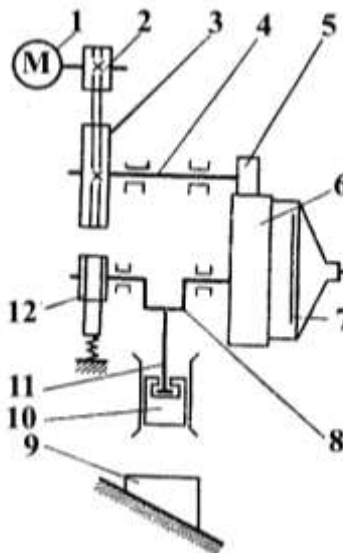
Cinematic scheme of a crank hot-forging press: 1-electric motor; 2 – pulley; 3 – fly-wheel; 4 – shaft; 5, 6 – gears; 7 – friction coupling; 8 – crank; 9 – table; 10 – plunger; 11 – rod; 12 – brake
